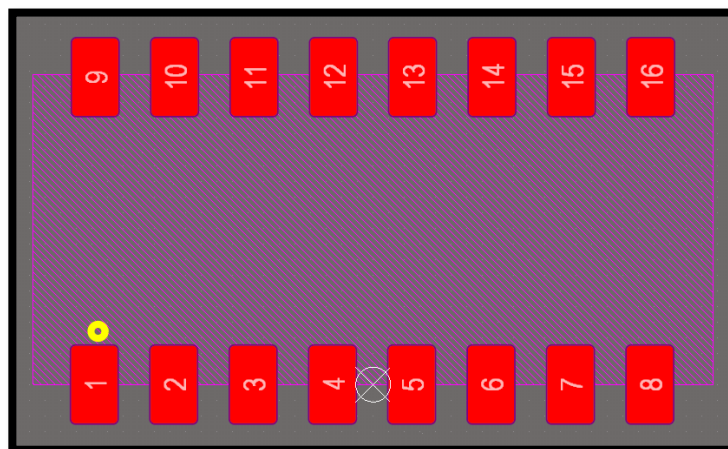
The PCB Footprint for the DIP Switch in the Library; 219-8LPS
